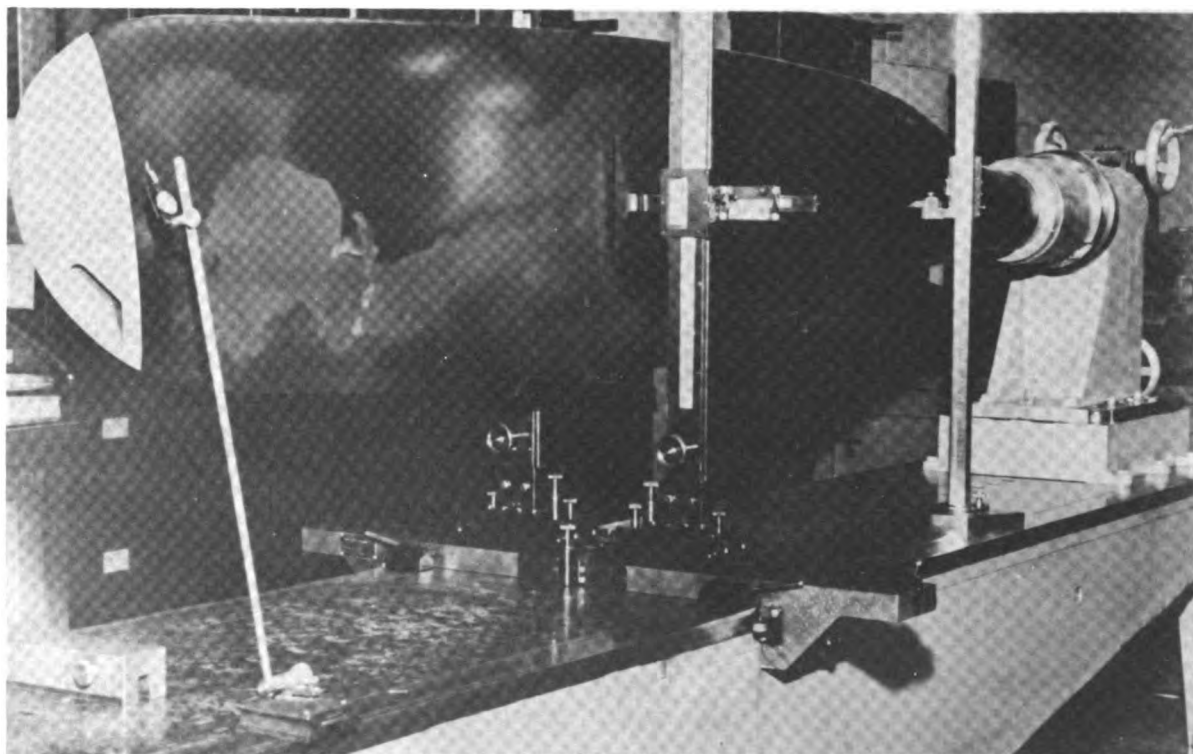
Blade inspection fixture (Buck).
